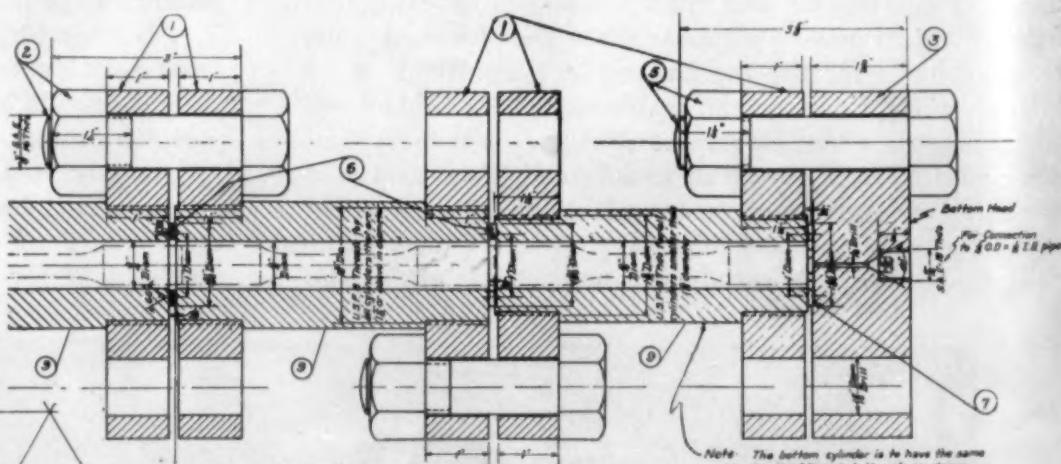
Detail of Test Cylinder. (1) Flanges. (2), (5) Nuts and Bolts. (3) End Piece. (6), (7) Copper Gasket. (9) Test Cylinder.
